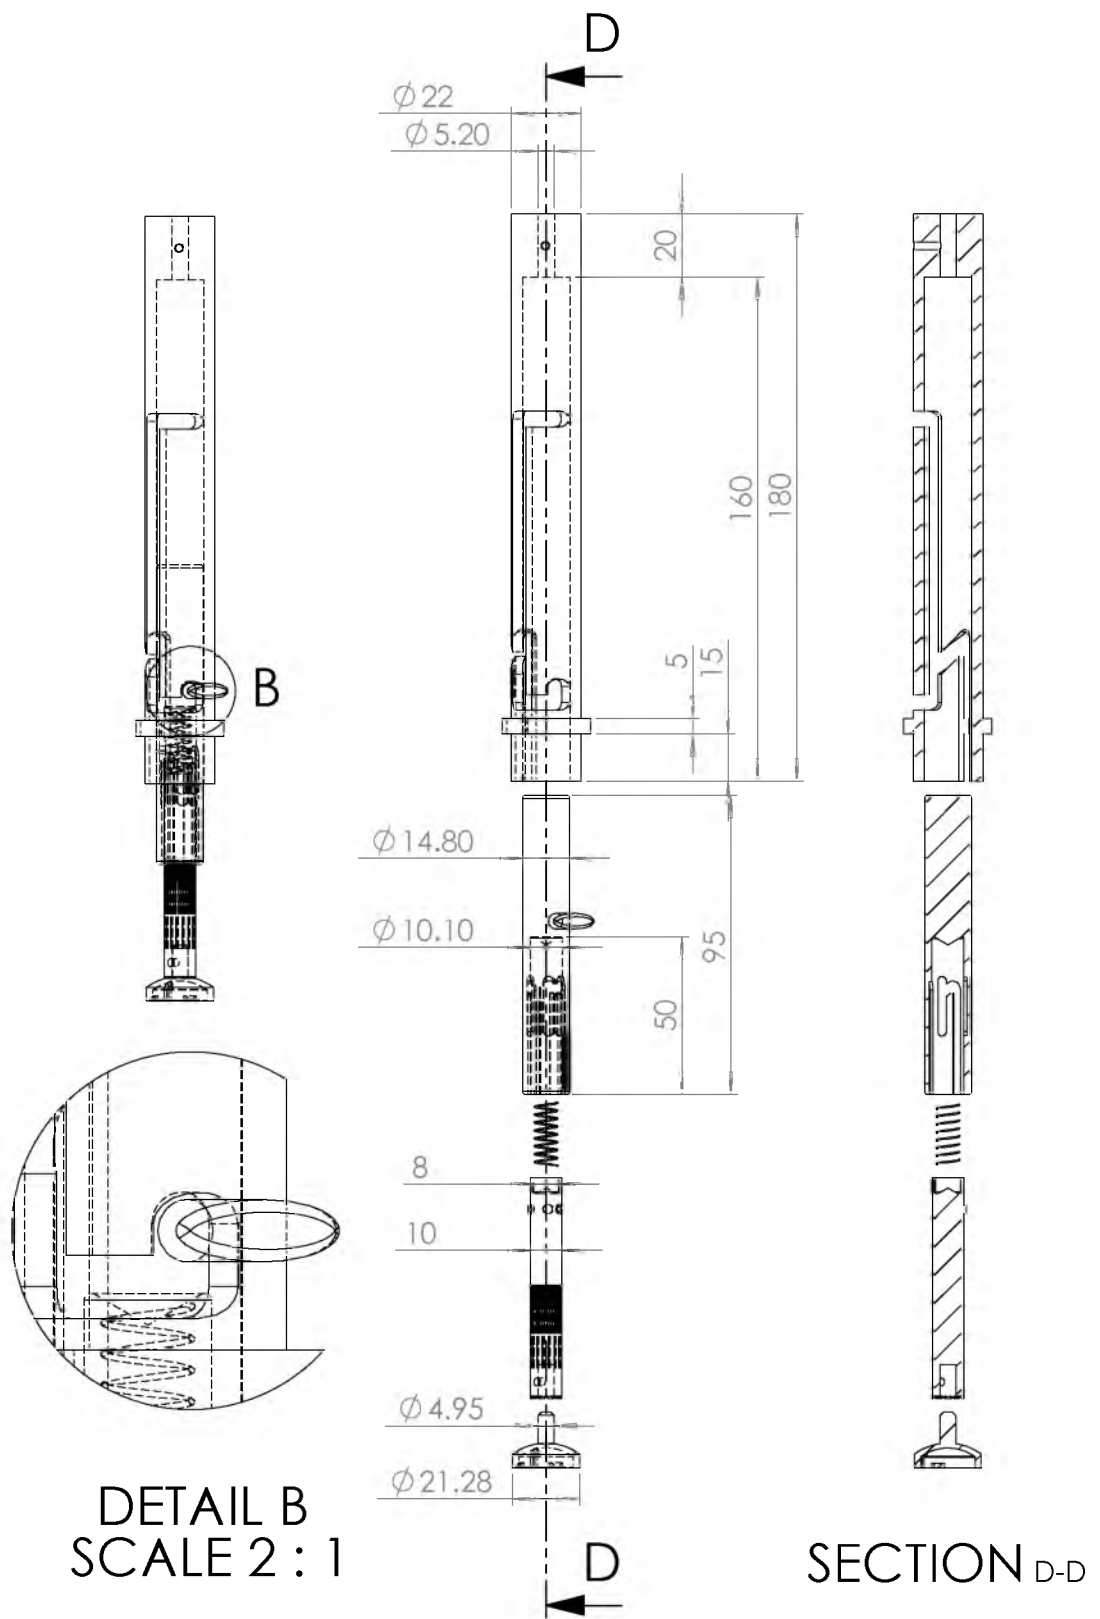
Dimensioned drawing of the lock-down shaft showing that a spring is used to exert downward force onto the plaque, keeping it firmly in place during acquisitions. Dimensions are in millimetres.
